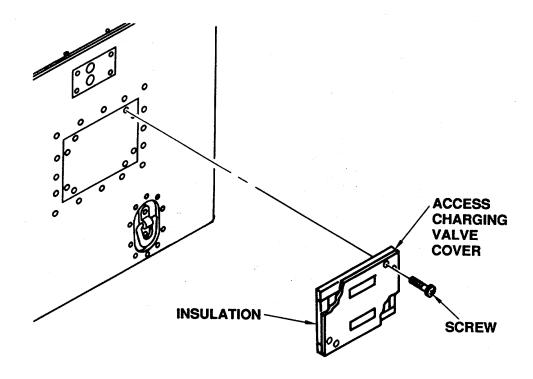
Access Charging Valve Cover Removal/Replacement
